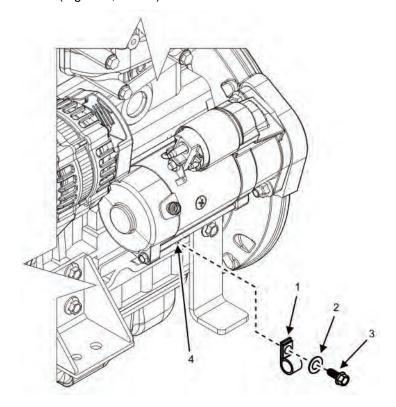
Electrical Connector Clamp Exhaust Side — Removal.
